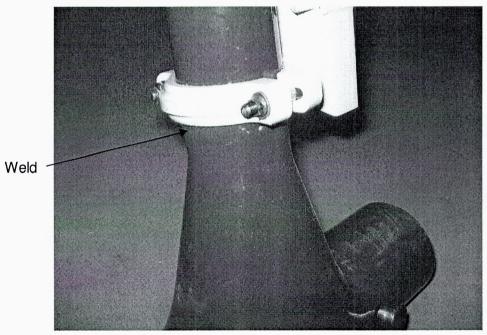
Aft Beam Installation, Bottom Clamp
